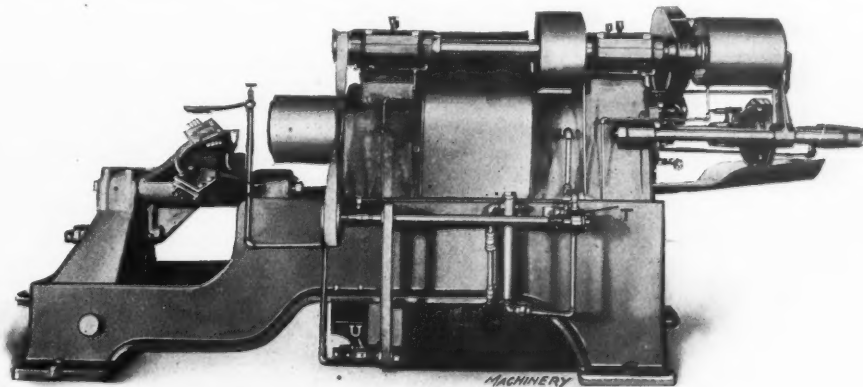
Rear View of Warren Lathe showing Pumps for delivering Lubricant to Bearings and Tools
